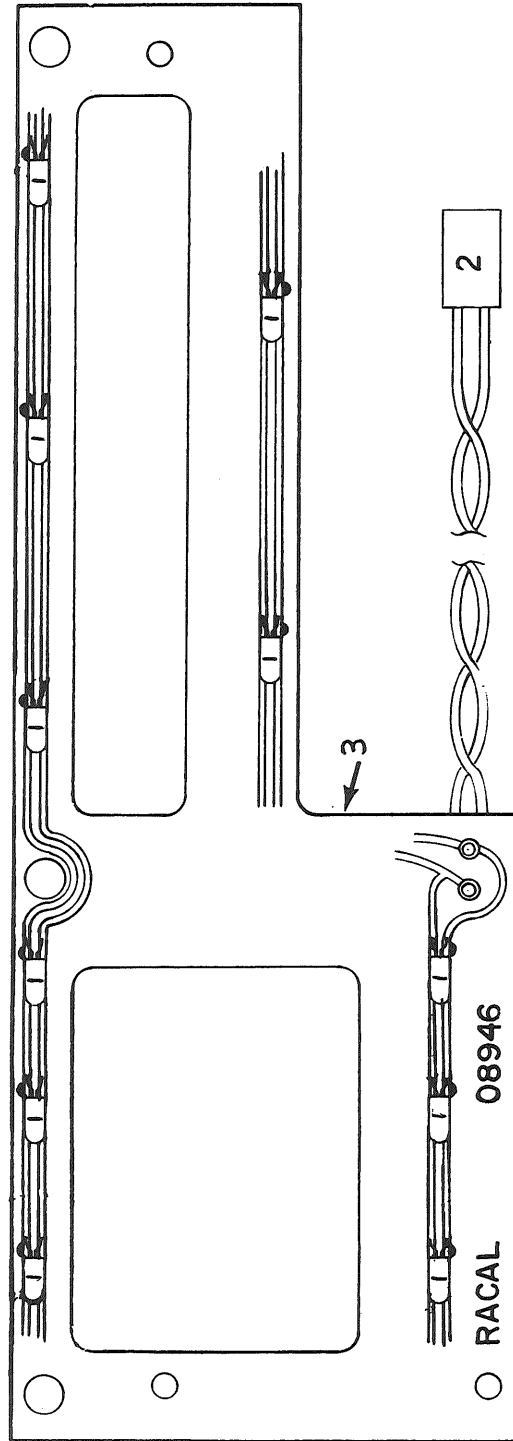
Circuit Card Assembly, LCD Lampboard
